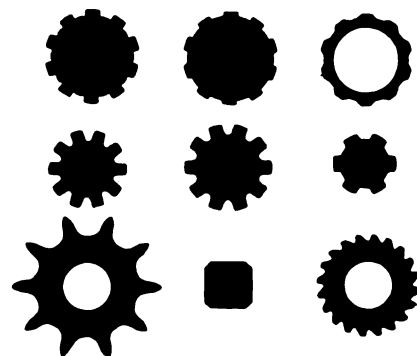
Common Forms of Spline Shafts, Sprockets and
